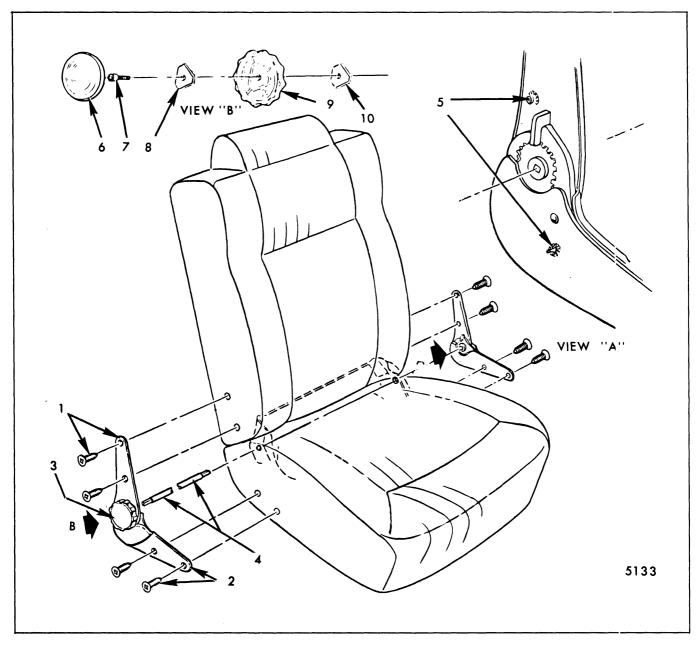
Salon Bucket Seat Reclining Back Hinge (Passenger Seat Shown)
